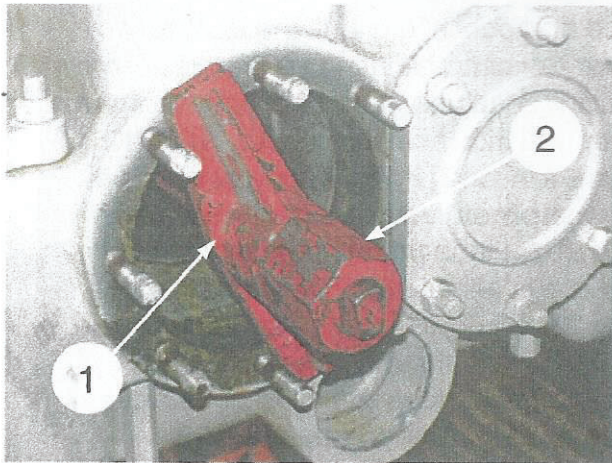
Mud Pump Liner Removal; Because of the tightness resulting from the proper installation of this assembly into the pump housing, a liner puller is required for removal. Insert the puller [1] such that its pulling shoulders engage the inboard or back face of the liner. Slowly tighten the puller rod nut [2] until the assembly can be removed.
